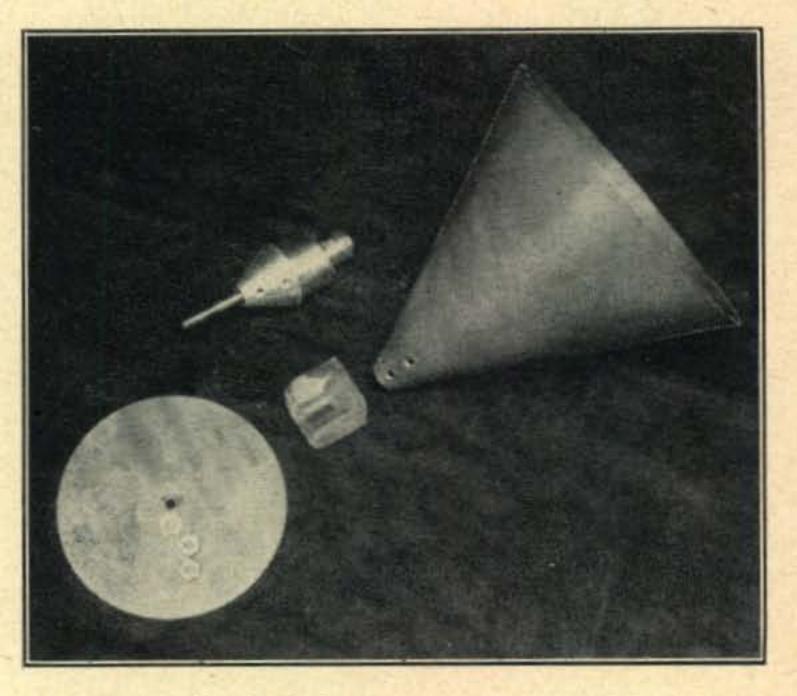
An "exploded' view of the model B discone illustrating the simplicity of construction. A special flange, not shown, was welded to the base of the antenna for ease in mounting to an automobile roof.
